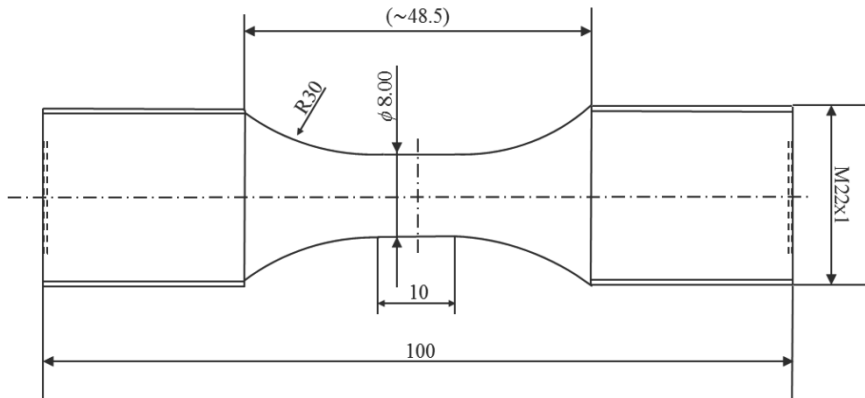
The dimensions of the test bar for the quenched and tempered 34CrNiMo6 (A&B) steel used for axial fatigue testing.
